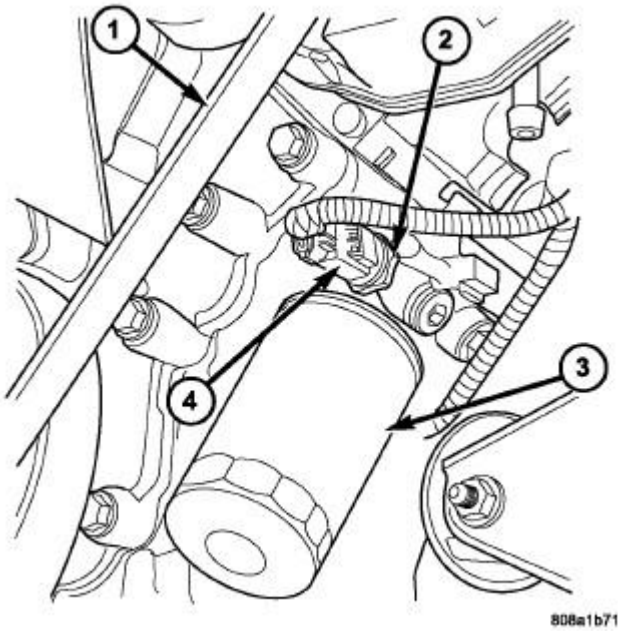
Belt, Oil Pressure Sensor, Oil Filter & Connector
